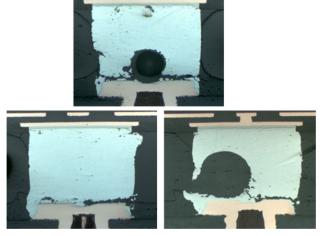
Solder Joint Cracking with Solder Joint Encapsulant Material B After ATC Testing (3500 cycles)
